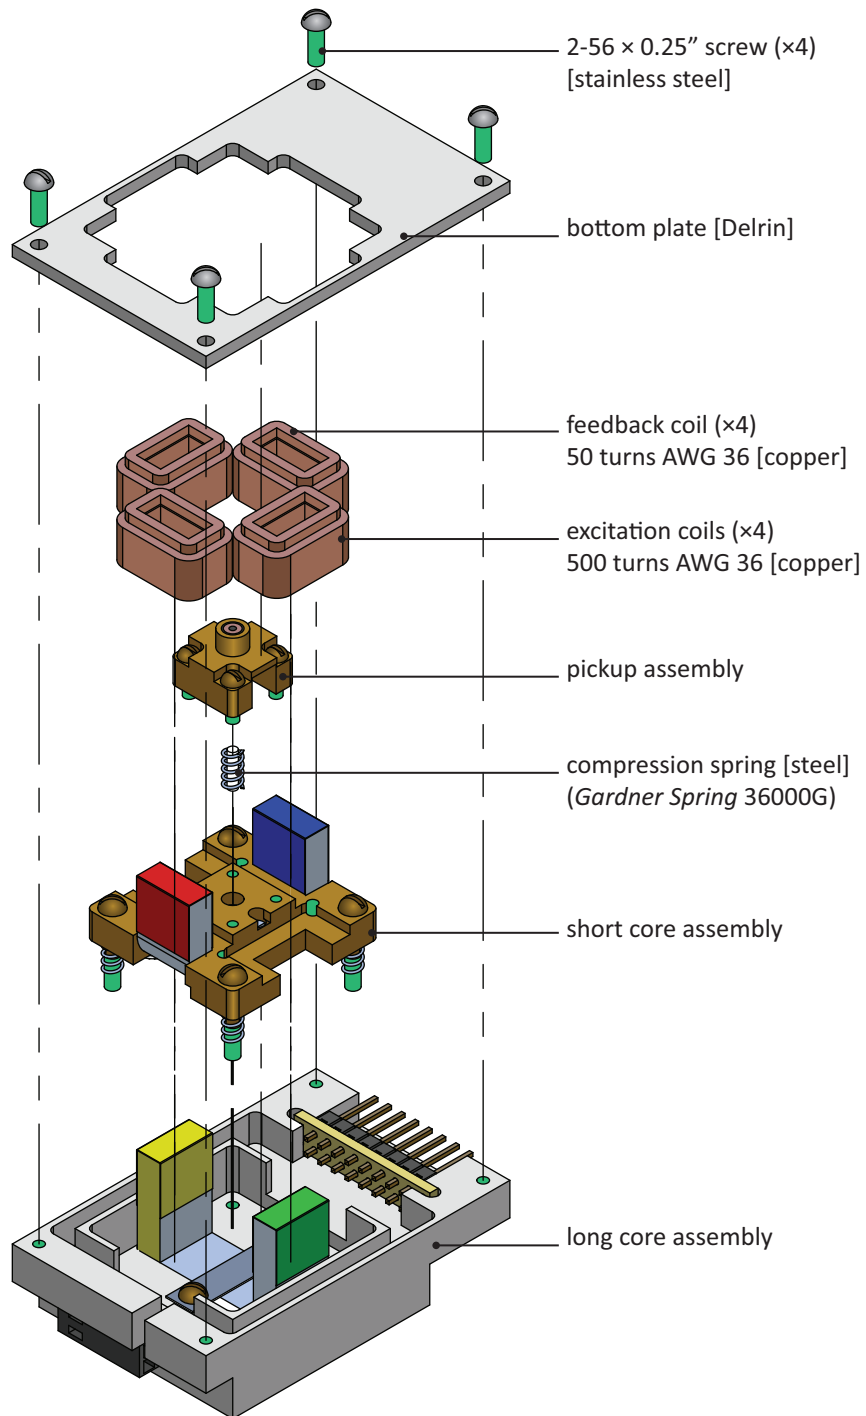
Exploded view of the SL4P assembly. Component materials are identified in square brackets. 1:1 scale.
